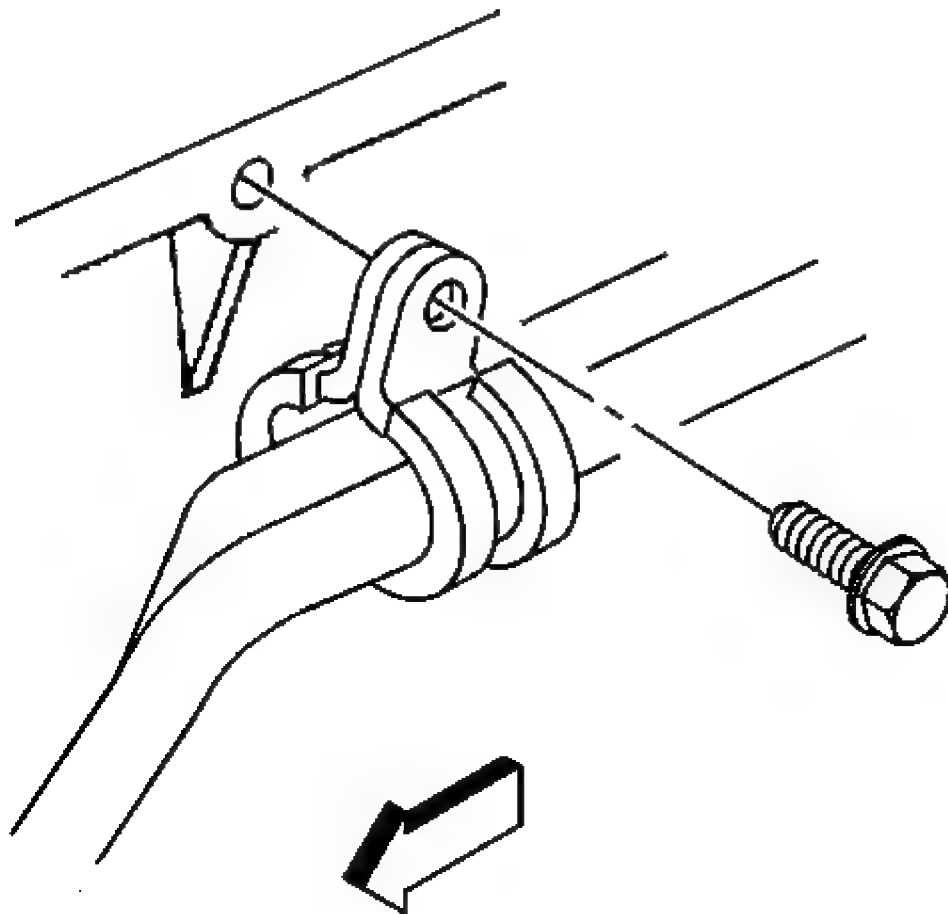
View Of Remote Oil Filter Inlet & Outlet Hose Clip Bolt
